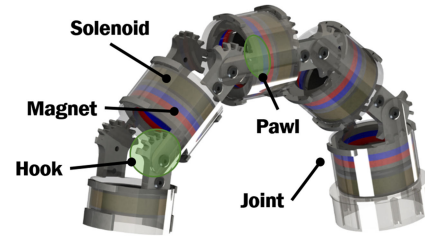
Representation of the shape-locking mechanism of the flexible joint using mechanical latches and magnetic force.
